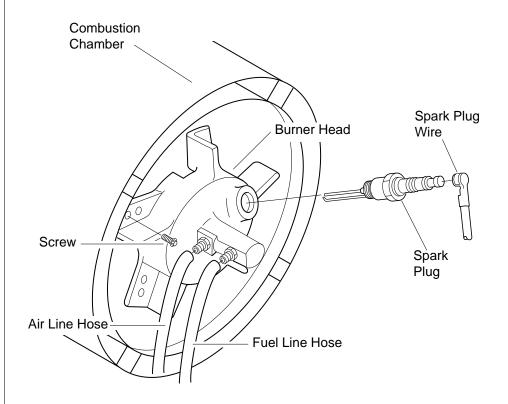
Removing Burner Head, 70/90,000 BTU/Hr Models
